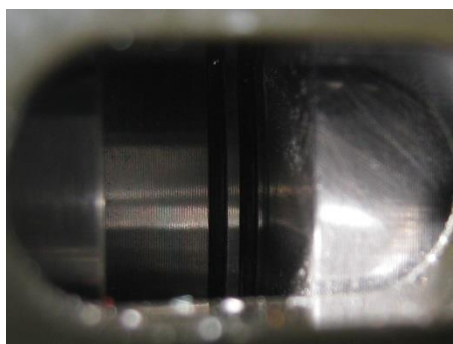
Two rings should be visible when the cable compression is correctly adjusted.
